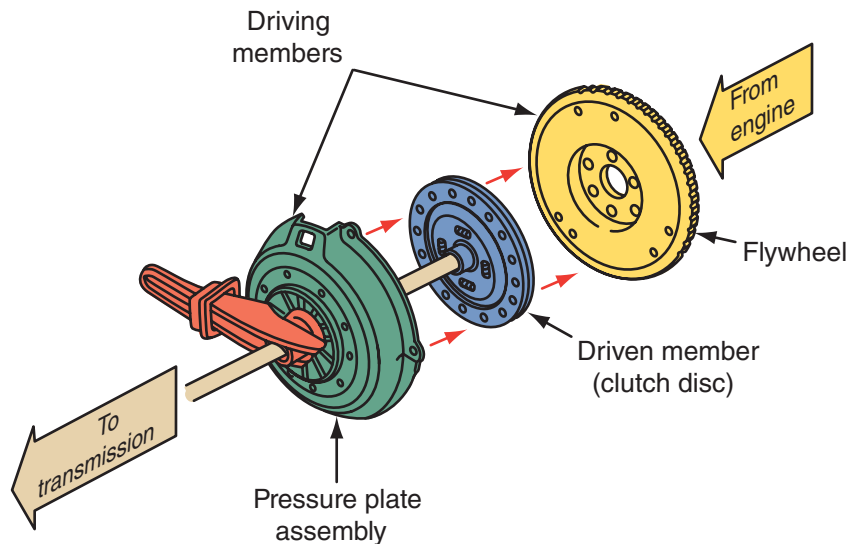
When the clutch is engaged, the driven member is squeezed between the two driving members. The transmission is connected to the driven member.
